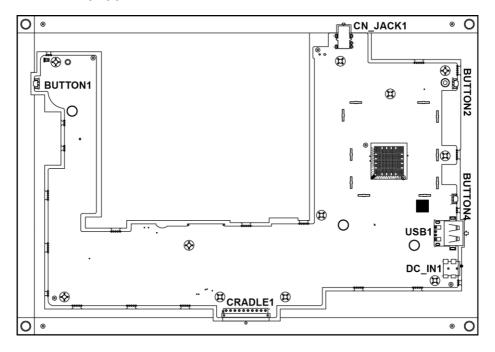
MB-5100 Main Board Component Locations (Top View)
